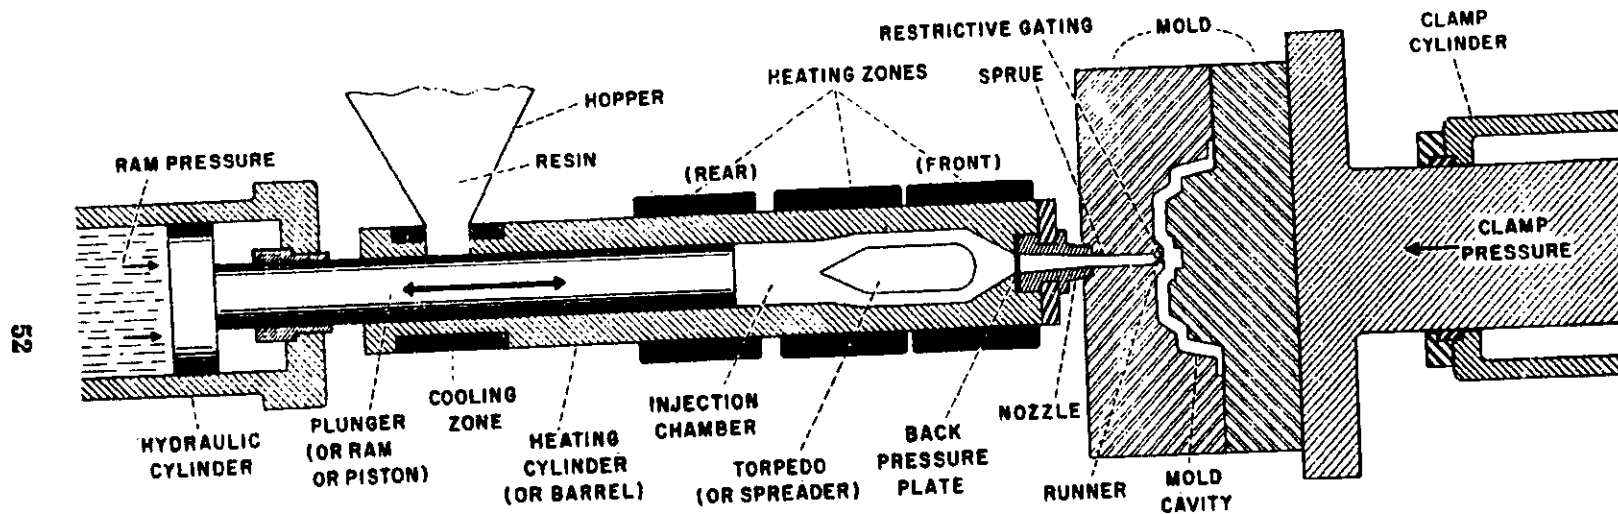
Schematic cross section of a typical plunger (or ram or piston) injection molding machine.
